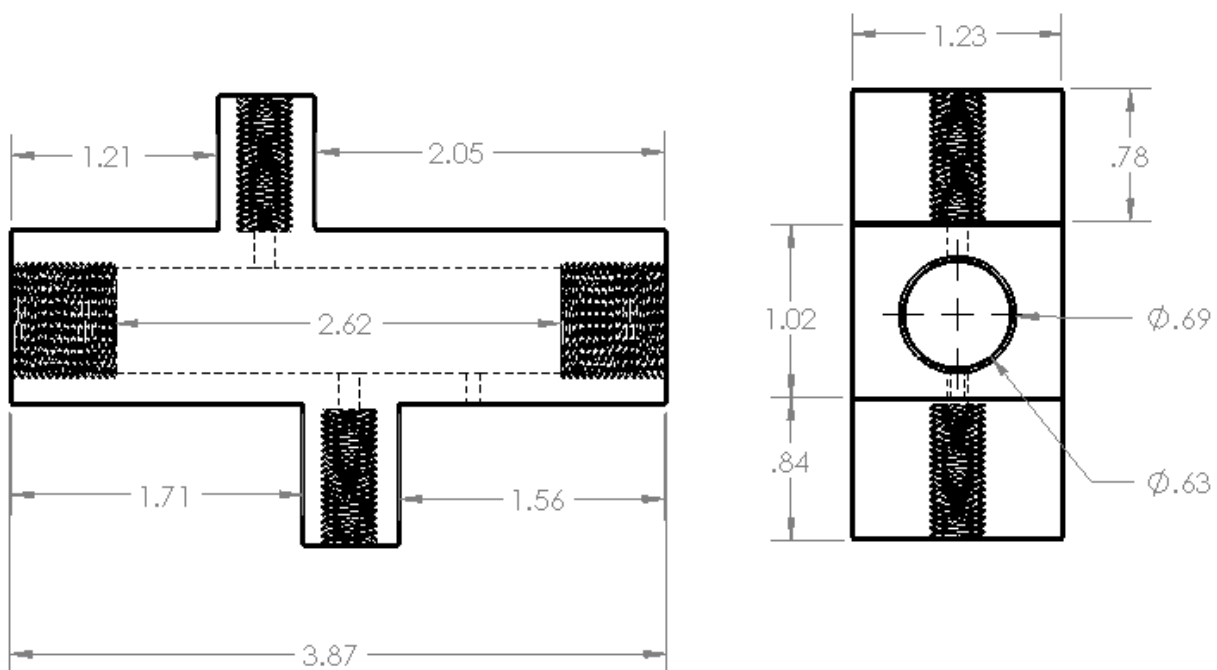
Solidworks drawing of pyrotechnic valve housing.
